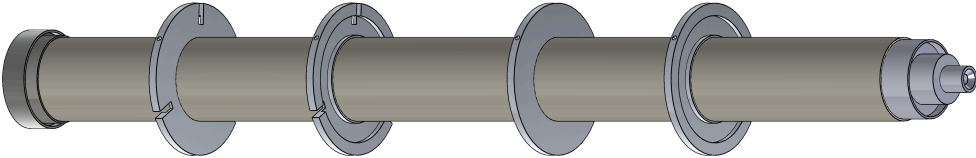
Phenolic tube-centering rings assembly, with motor tube inserted and Aeropack retainer.
